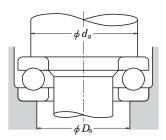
Face Supporting Diameters for Thrust Ball Bearings
